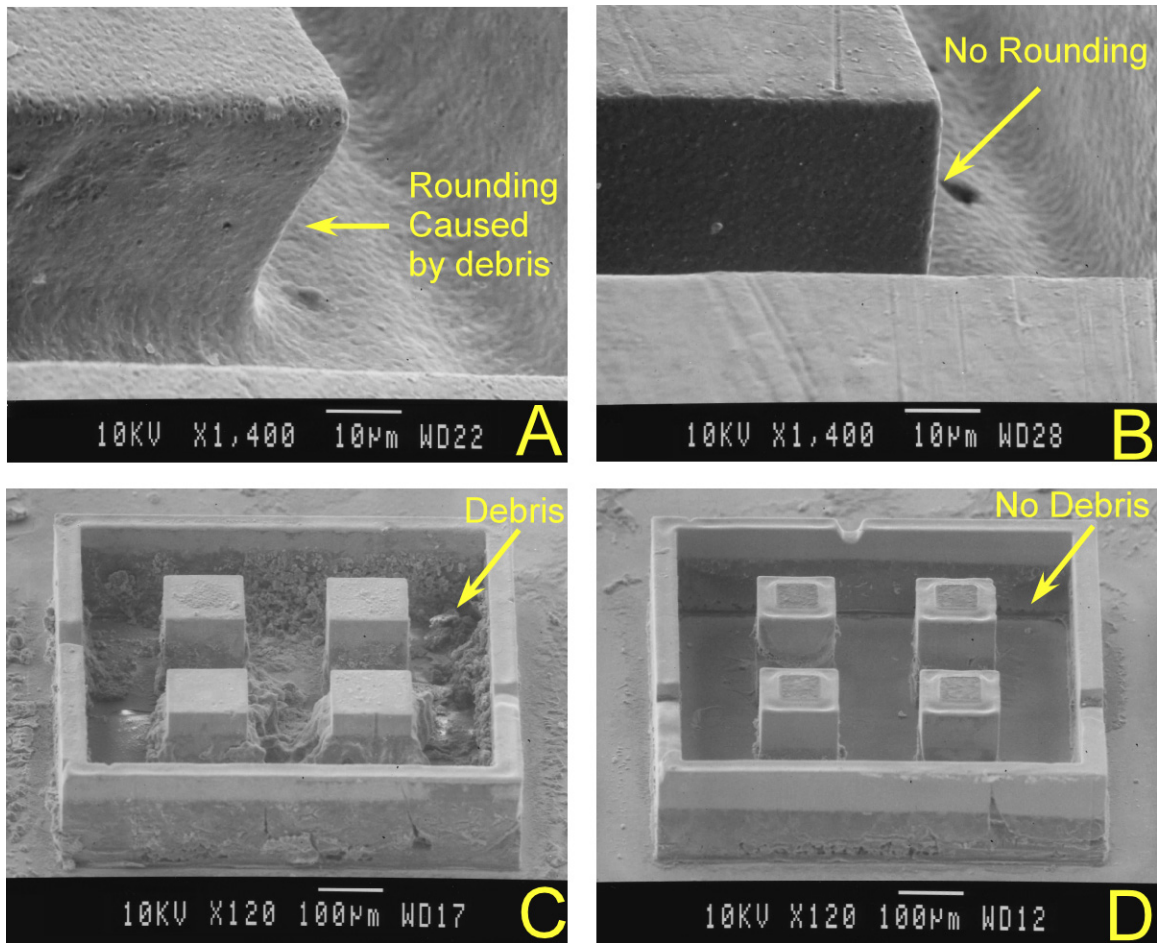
Hydraulic debris flushing through workpiece utilizing bubbles from discharge and vertical dither of tool.
